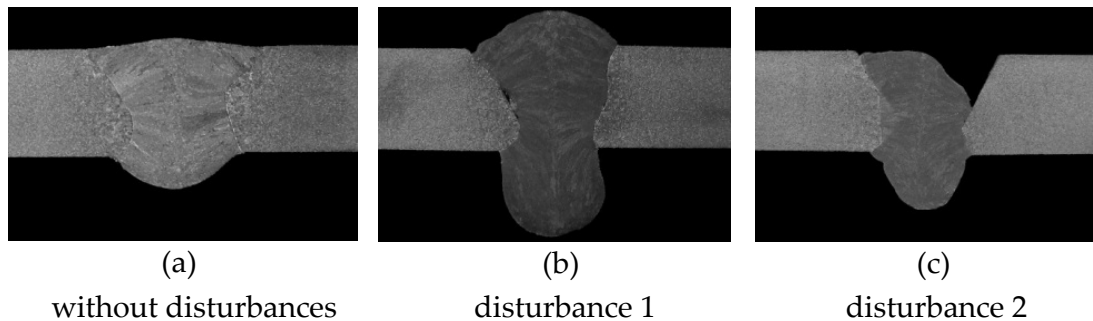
Macroscopic examination of the padding welds. Etching Adler, magnification x2
